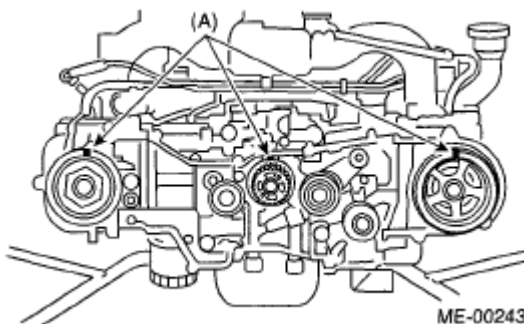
Identifying Alignment Marks On Cam Sprocket
